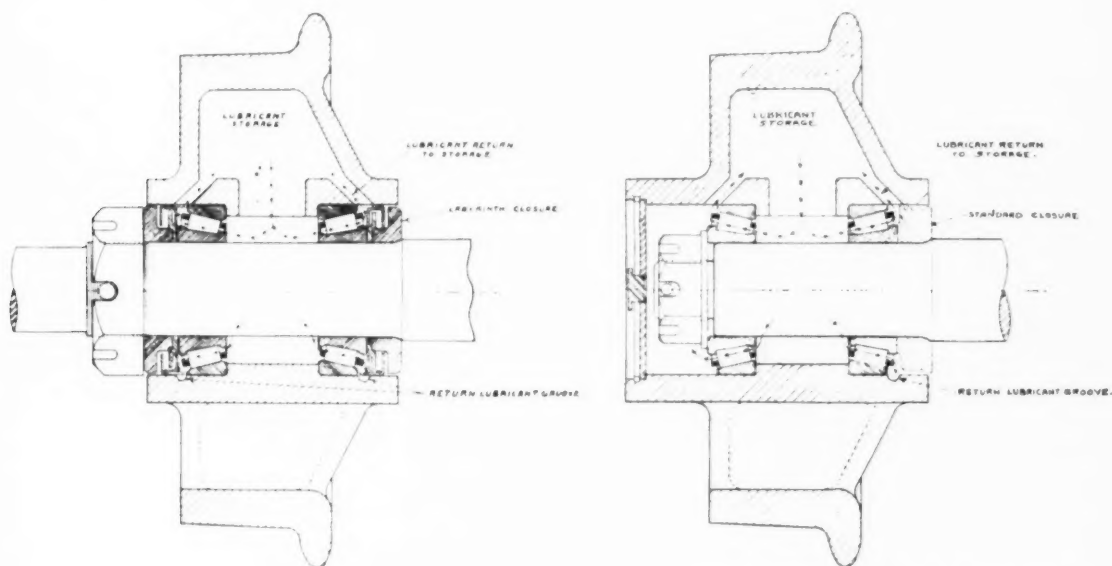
Details of Hockensmith design for mine car wheel lubrication. Note path of lubricant is indicated by arrows, and types of closures.
